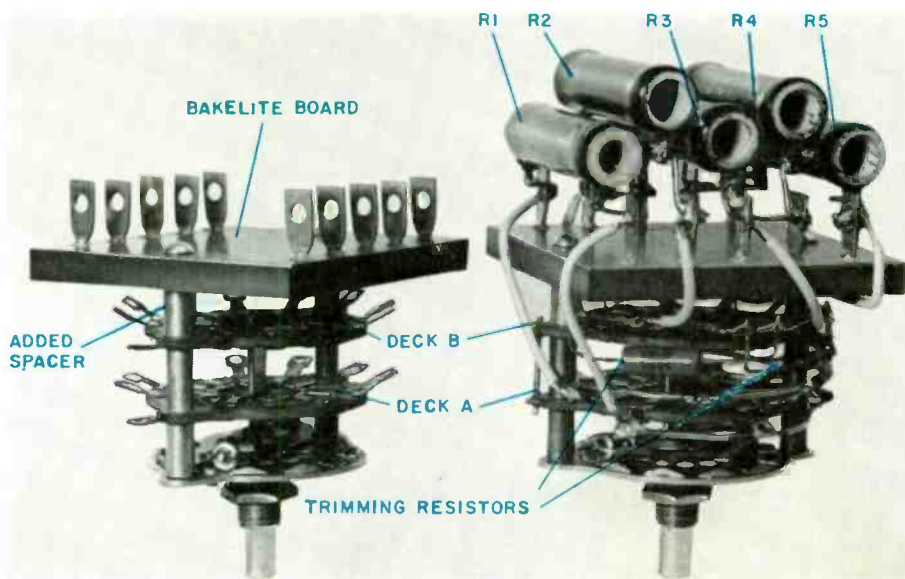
Switch and Bakelite board wiring, rear view. Photographs show further details.
